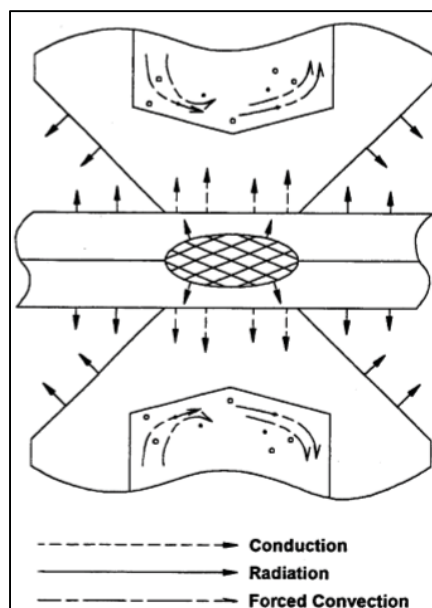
Heat Transfer in Resistance Welding³²
